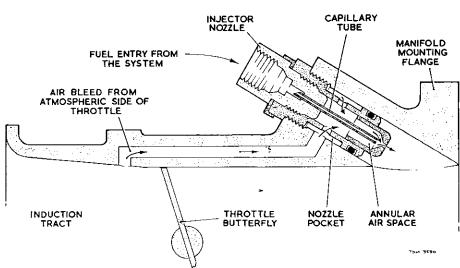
INJECTOR NOZZLE, SECTION VIEW
